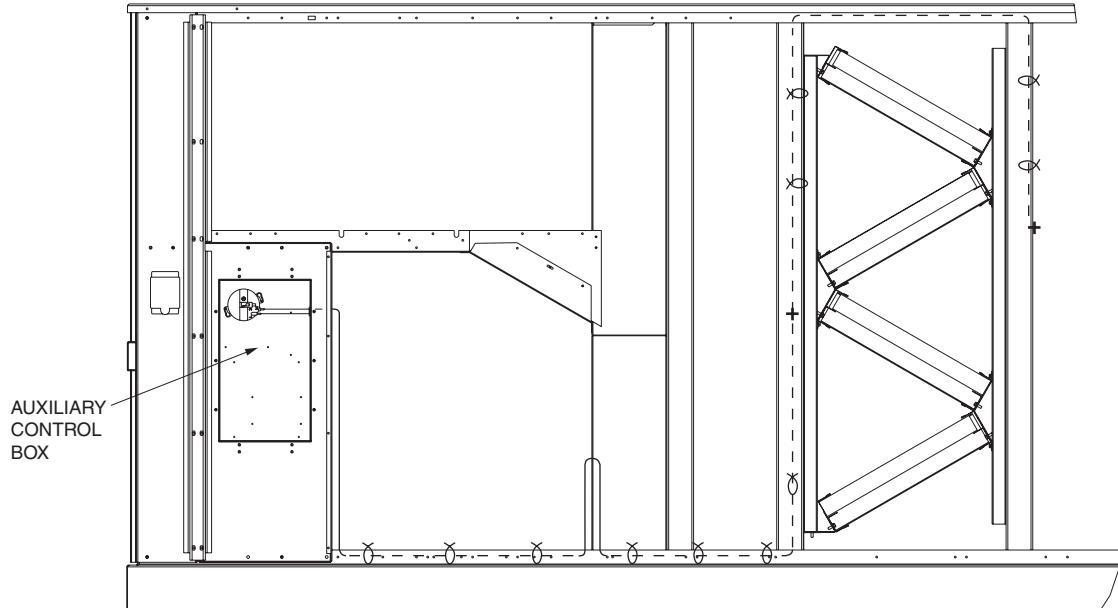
Auxiliary Control Box Location (Sizes 030-050)
